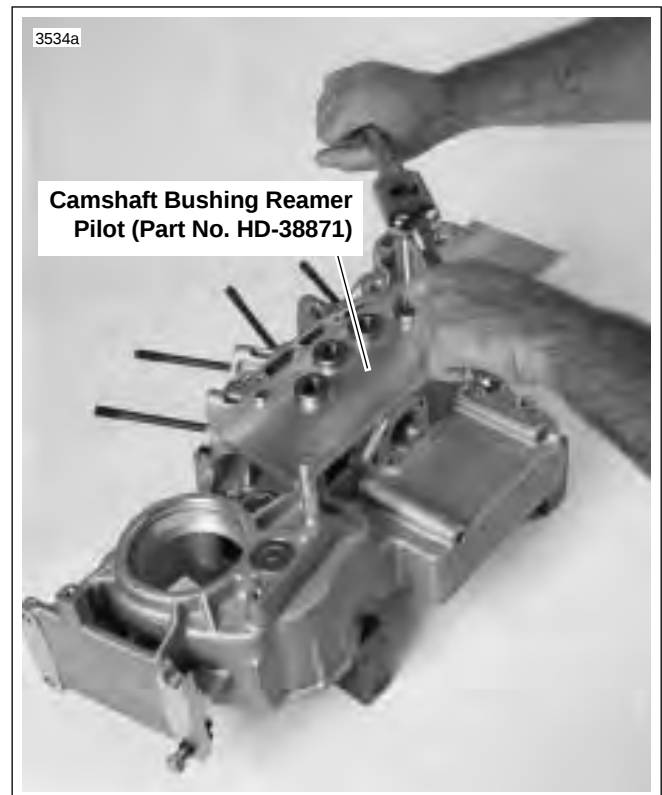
Reaming Cam Gear Bushing in Right Crankcase Half
